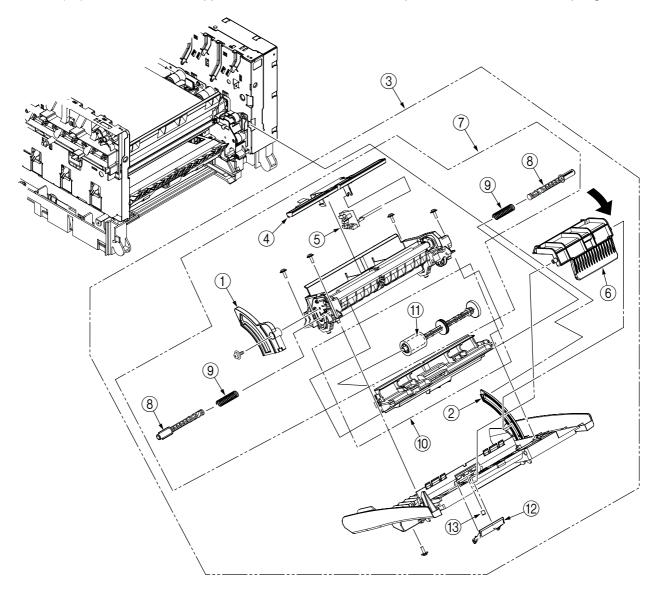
Feeder Unit / Board-RSF / MPT Hopping Roller / MPT Frame Separator / Cover-Front
